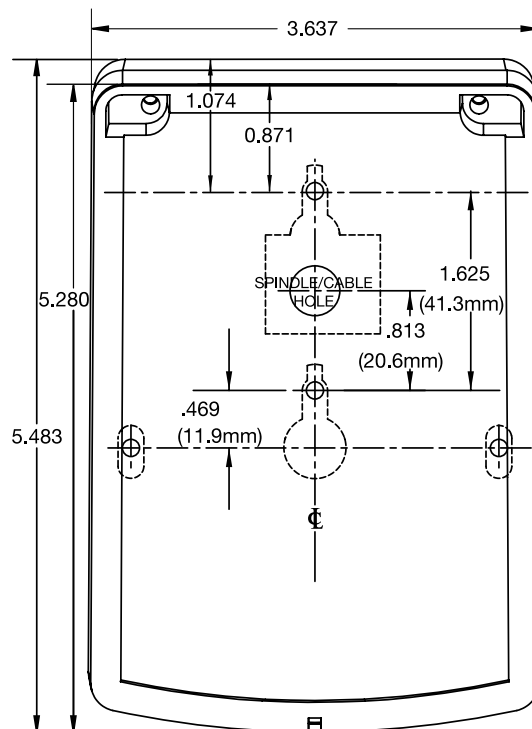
9150/9160 Dimensions for Mounting (Not to scale.)
